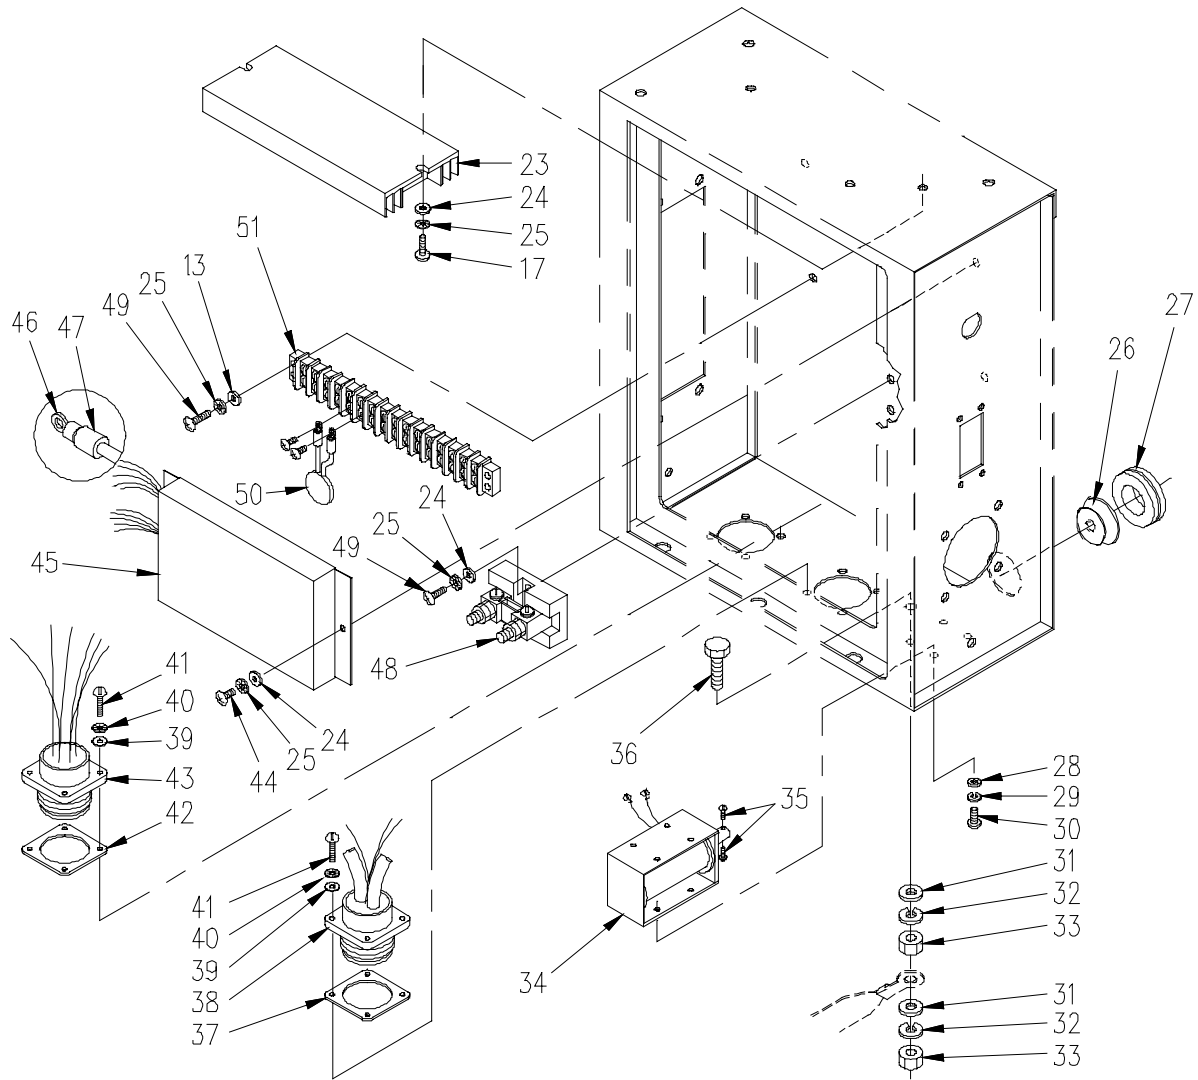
Control Panel Assembly (MEP-501A) (Sheet 2 of 3)
